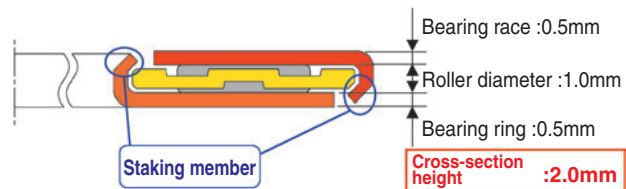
Construction of triple-unit 2mm cross section thrust roller bearing
